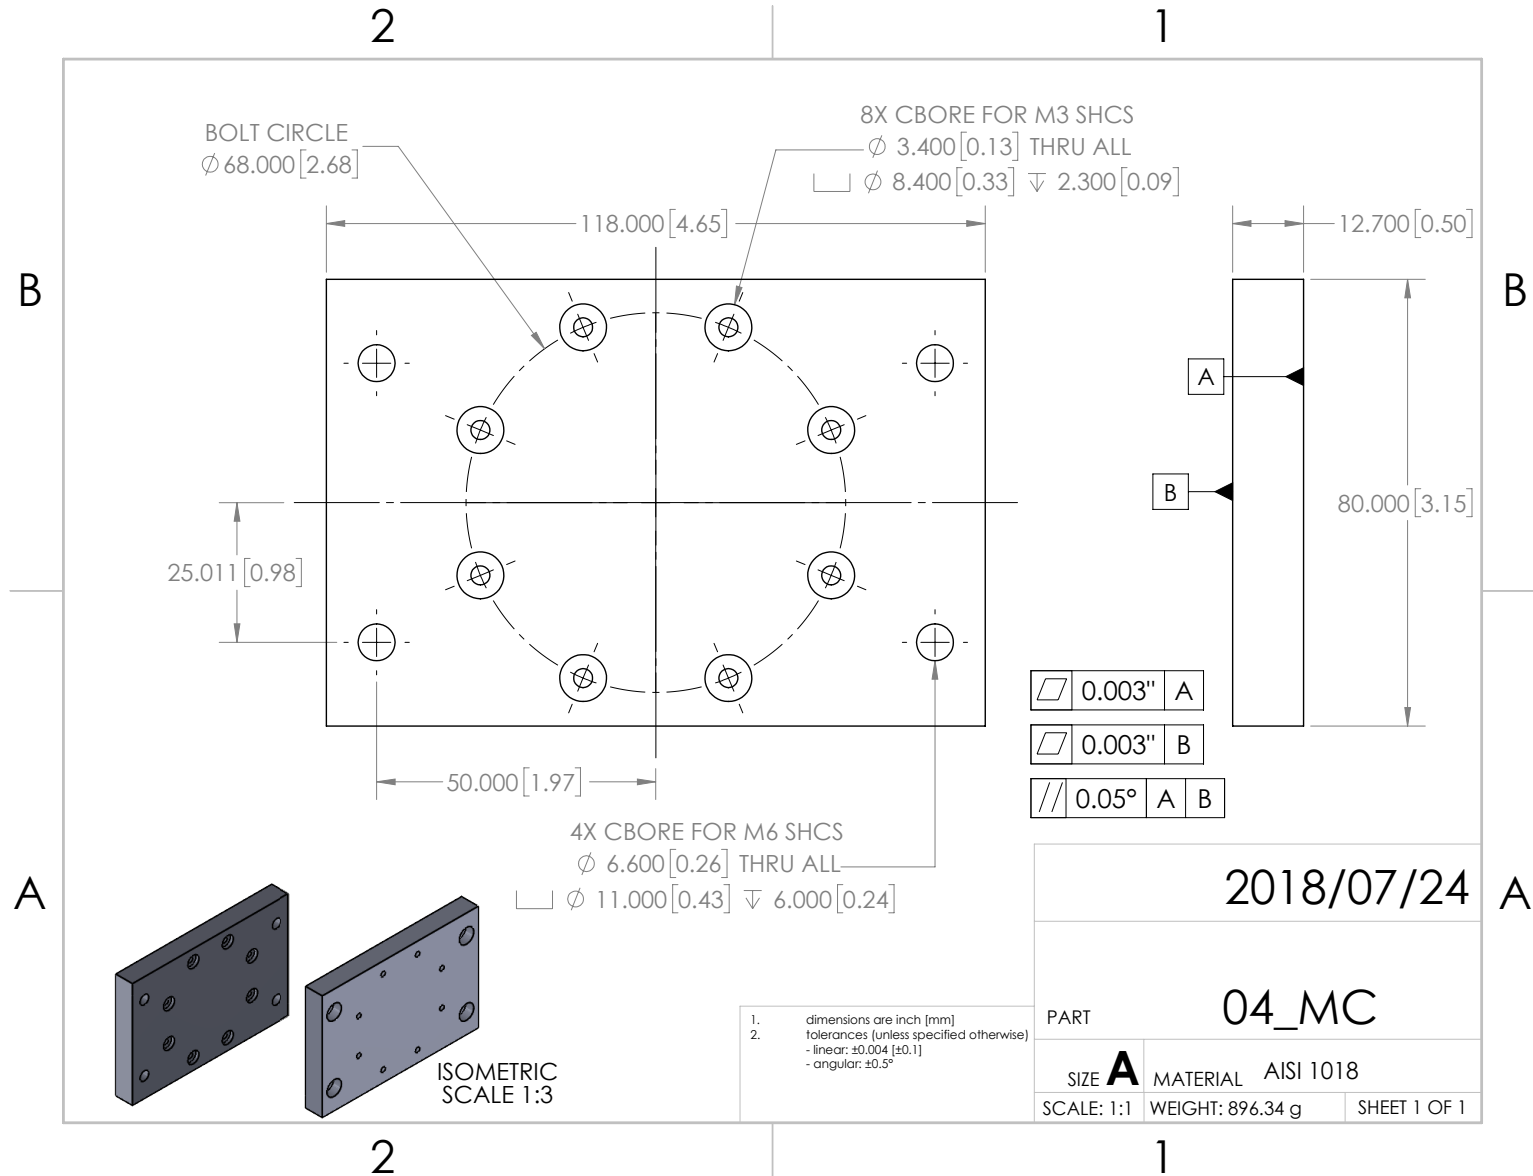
Fixture plate for mounting the load cell to the manual stages.
